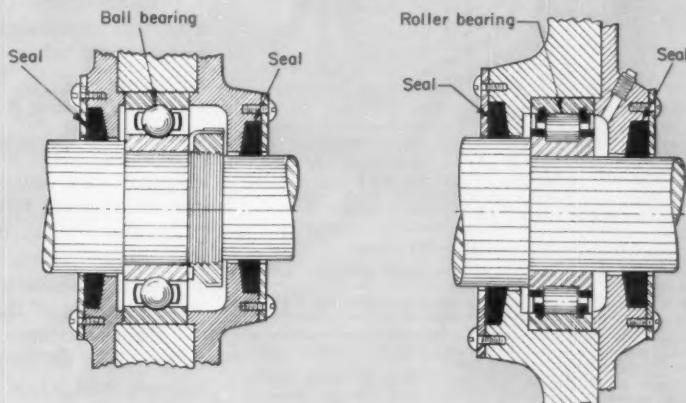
Mounting methods for felt seals. For both ball-bearing and roller-bearing assemblies, left-hand seals are shaft-shoulder mounted and right-hand seals are shaft-extension mounted.
